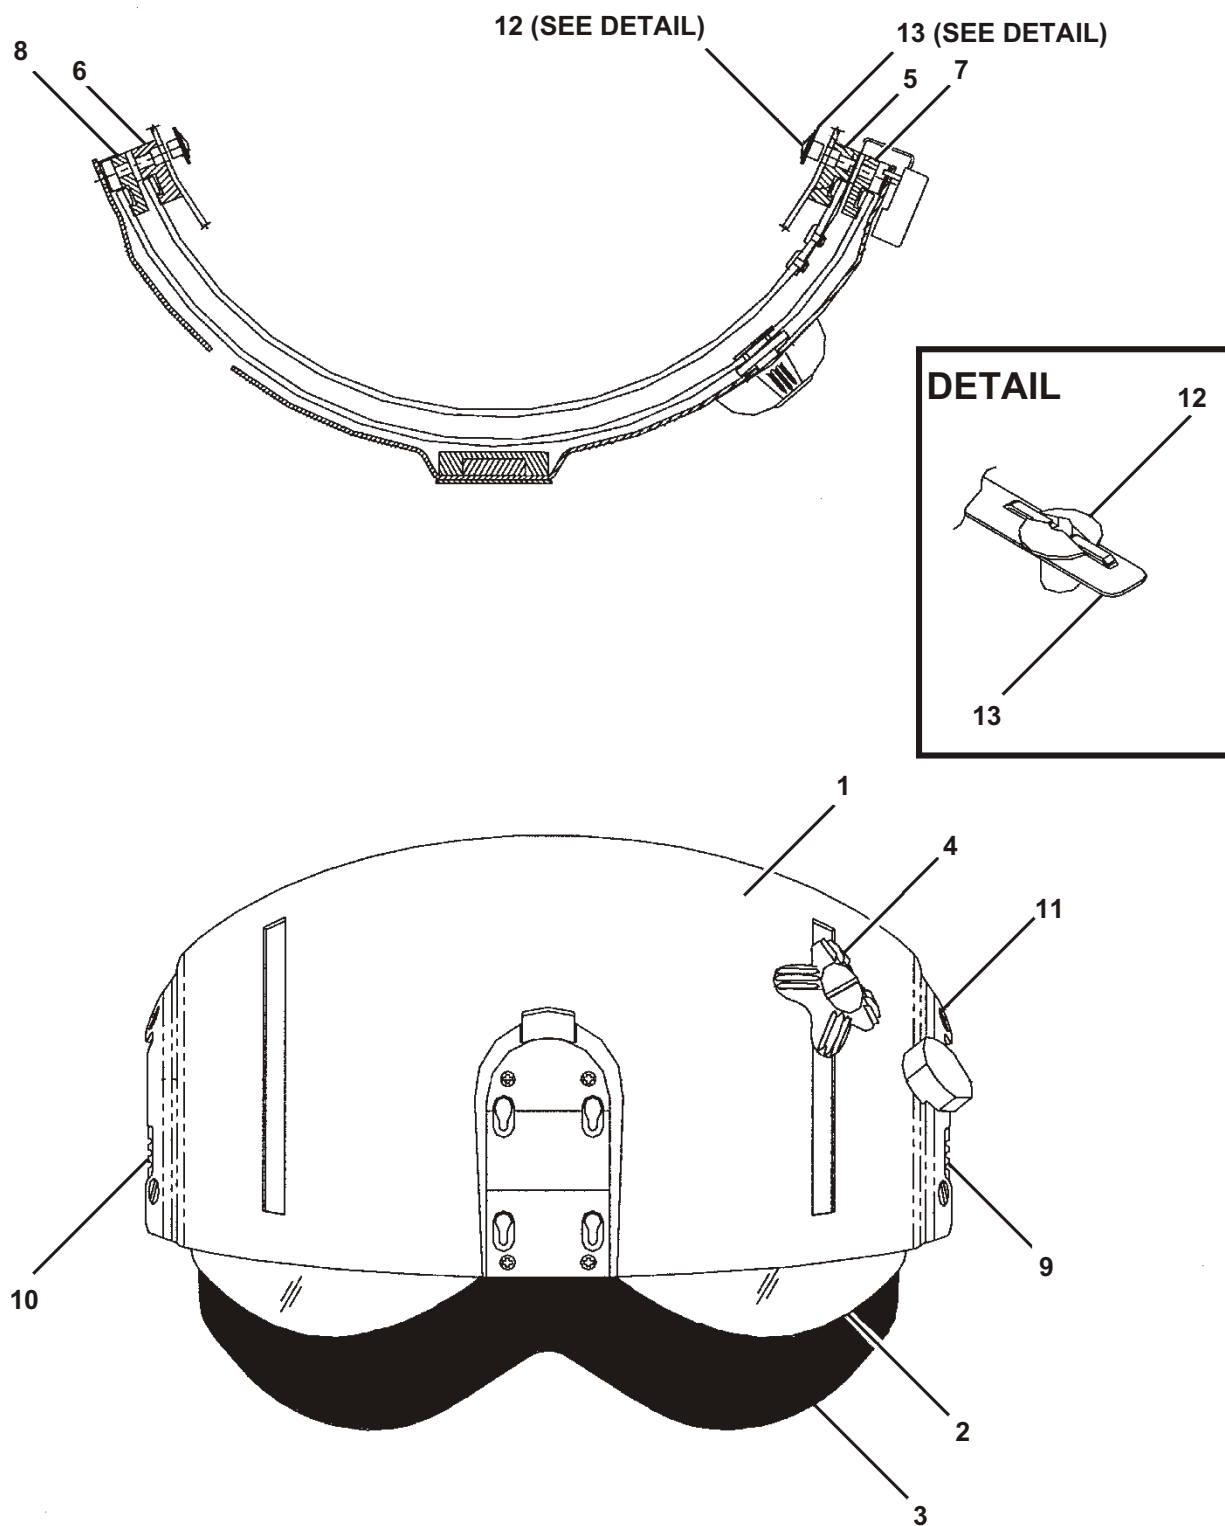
Dual Visor Assembly with Quick Disconnect
